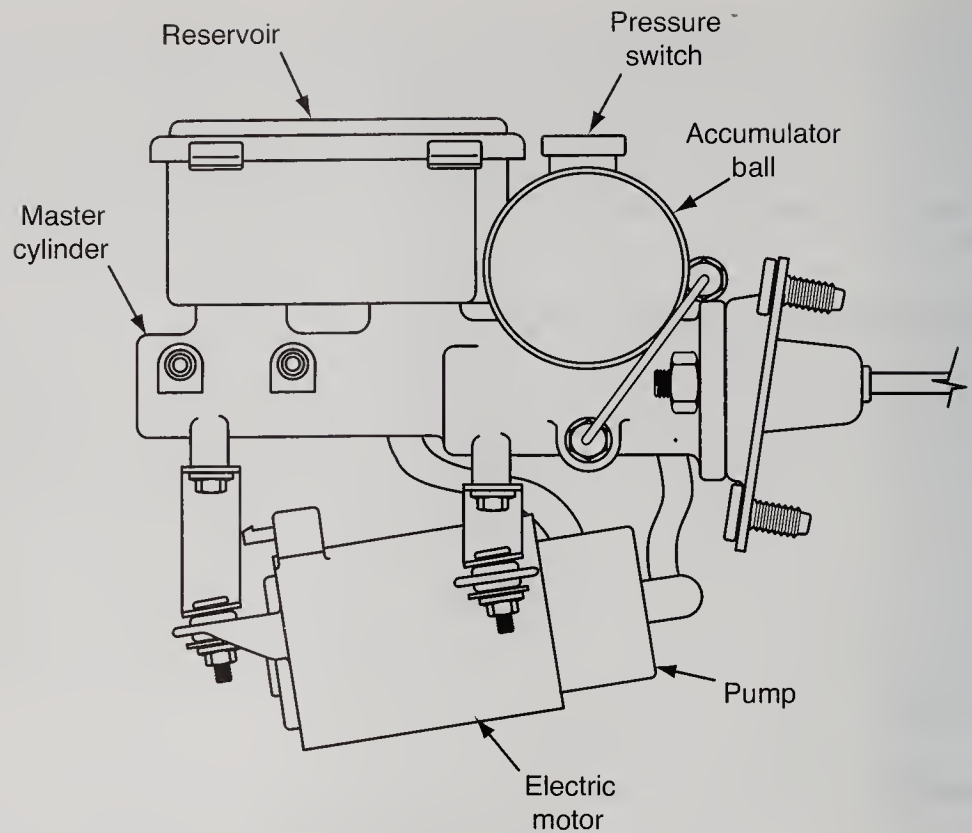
The major parts of a PowerMaster power brake assembly.
